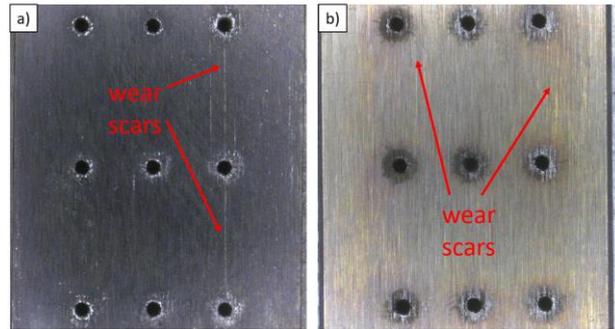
Wear scars and wear around the micro-holes at the a-C:H:W/a-C:H coating system (a) and Si₃N₄ coating (b) after strip drawing test.
